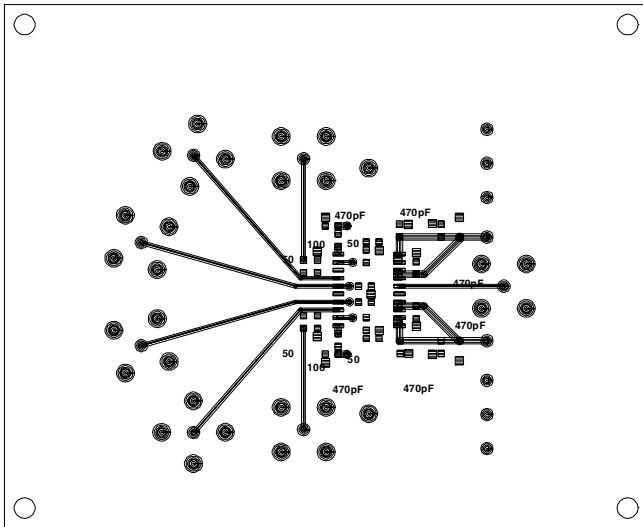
1X PC BOARD LAYOUT (BOTTOM VIEW)
